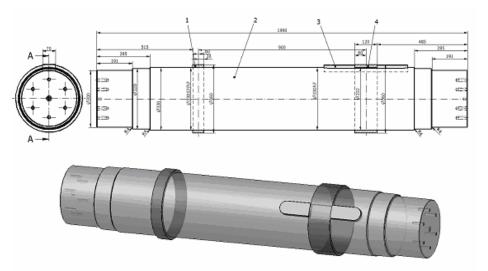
Modified pulley shaft at Lonea Mining Plant
